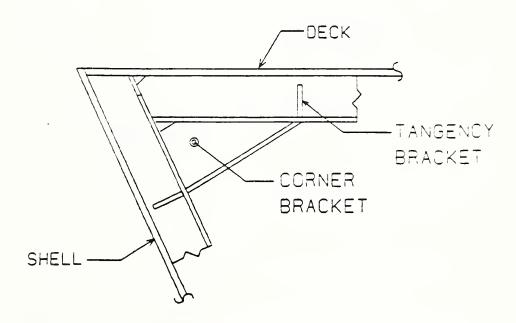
Example of a Deck/Shell Intersection with Plate/Shape Parts
